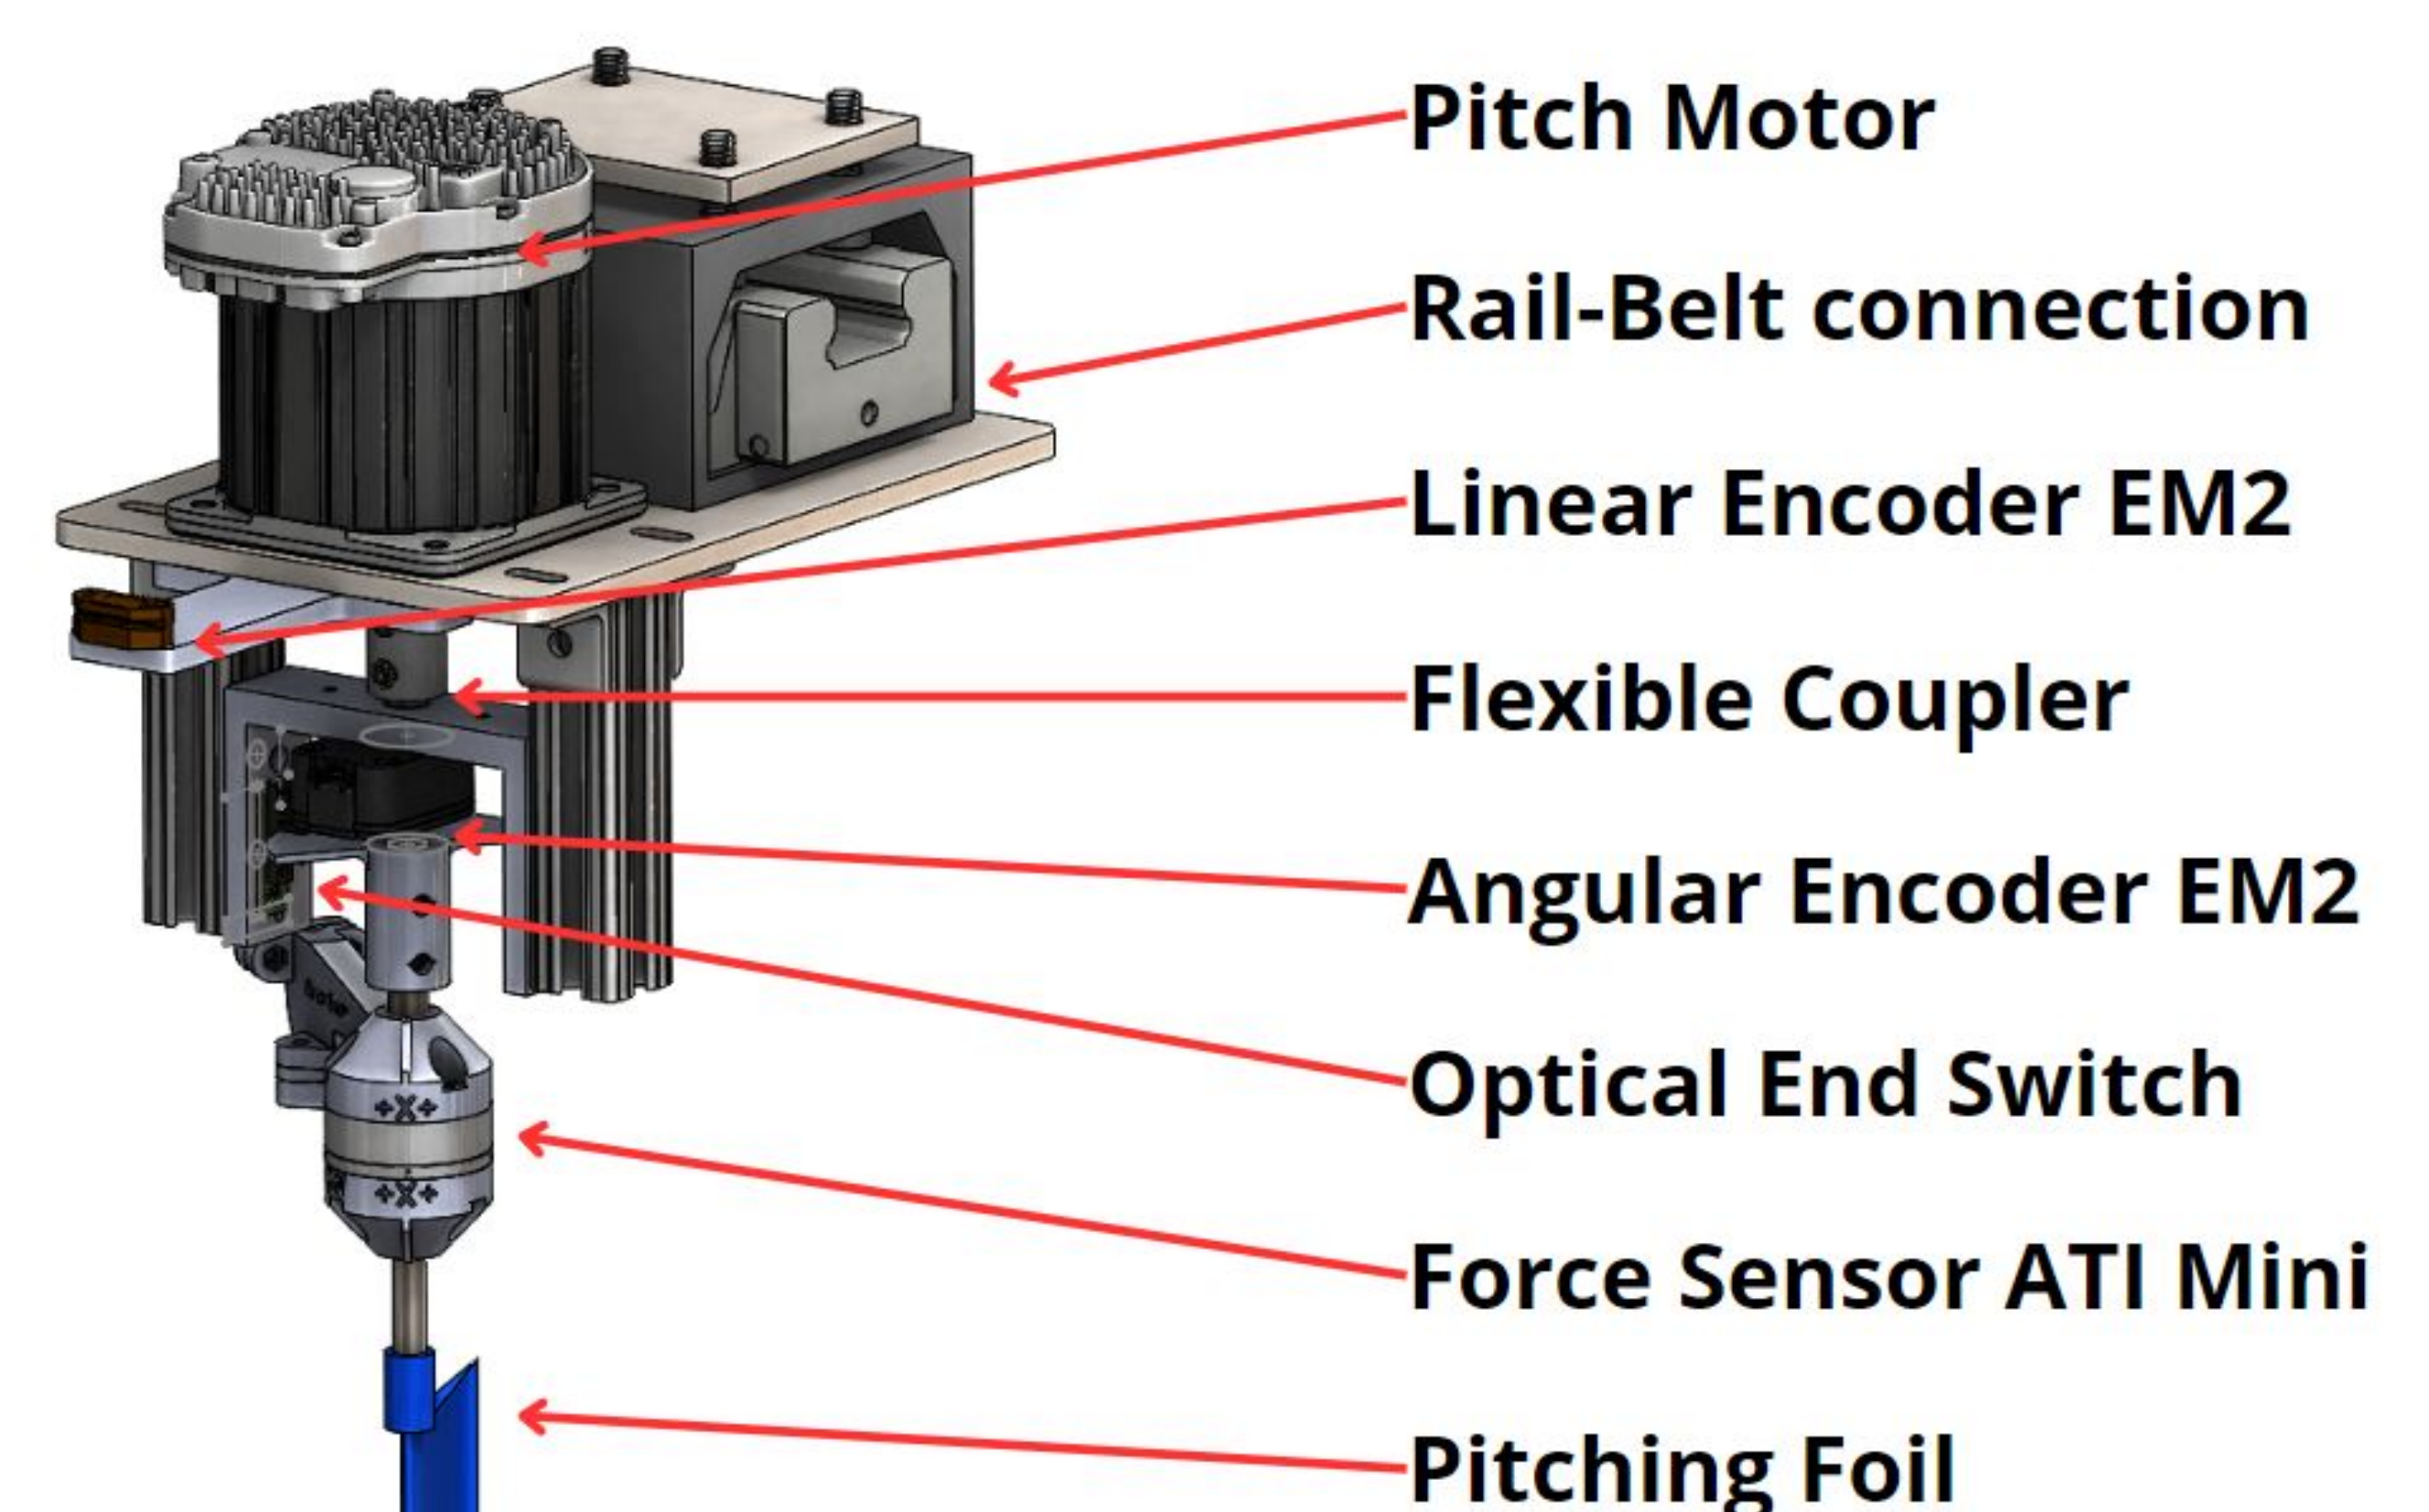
The mechanical CAD design of the improved heaving mechanism construction.
